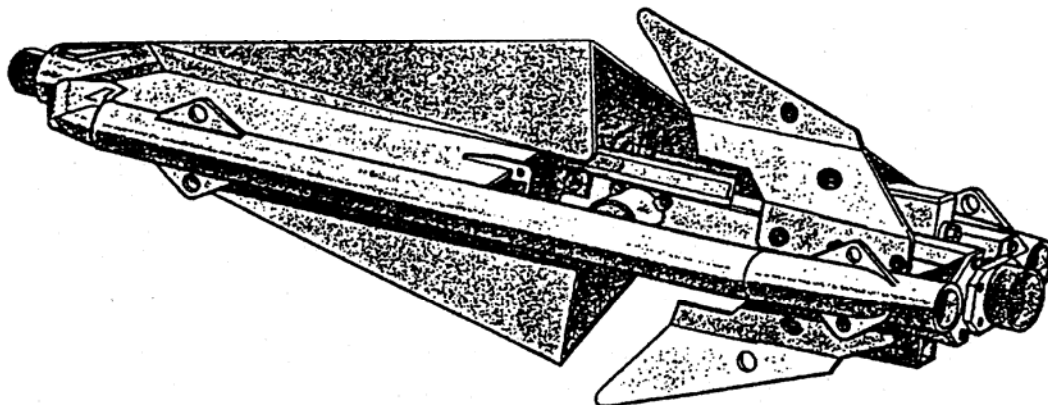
THE ACTIVE CUTTING GRAPNEL ASSEMBLY
